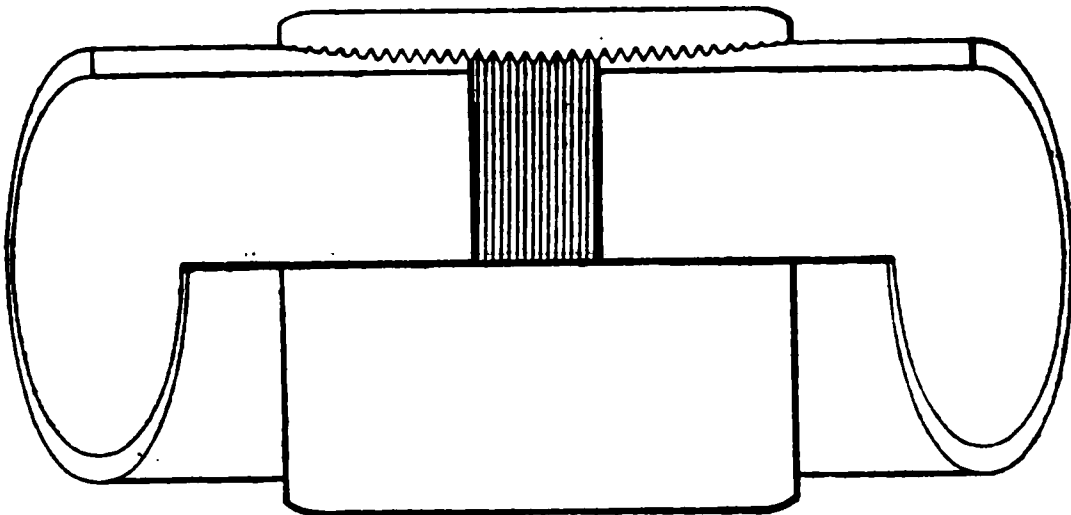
Typical Section of Allison Vanishing Thread Tubing Coupling and Joint — Not Upset
